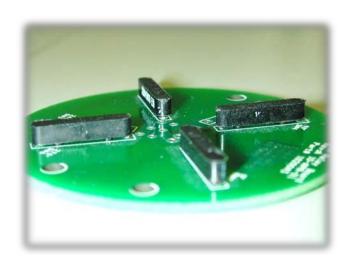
Example of a circuit board with reed switches for the pulse generation from a rotating magnet on an index shaft.
